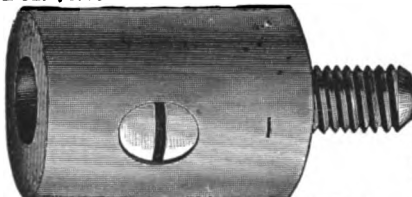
NO. 1. CHUCK FOR PRYBIL BORING MACHINE.
